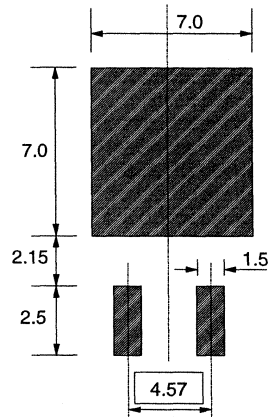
SOT428 : minimum pad sizes for surface mounting.
